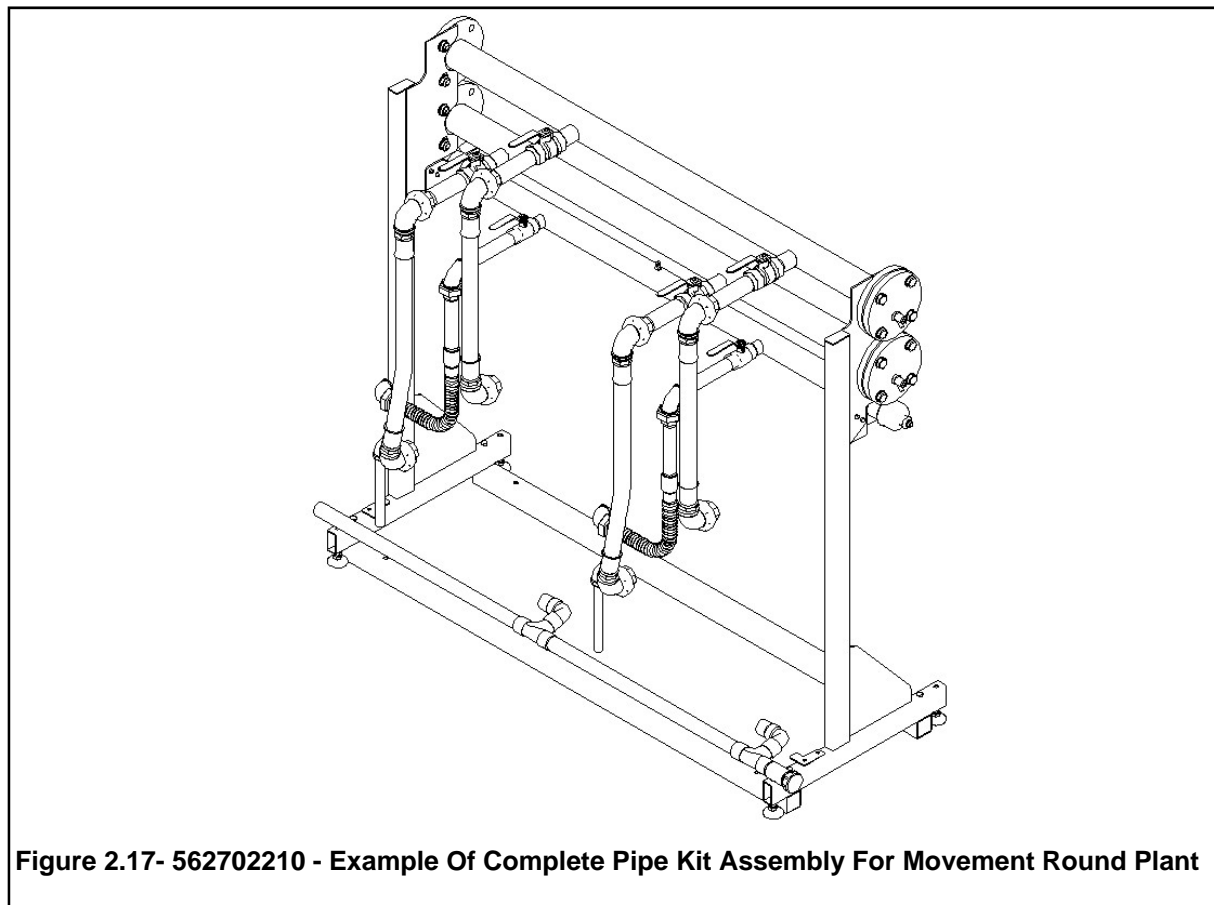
562702210 - Example Of Complete Pipe Kit Assembly For Movement Round Plant
